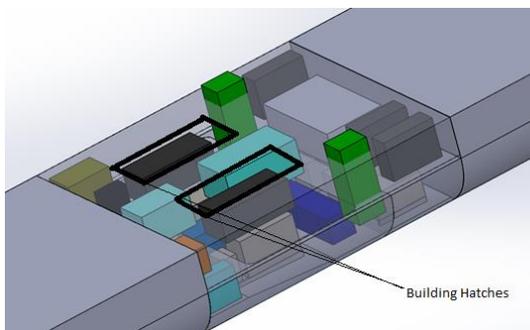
Modules in the engine room placed via a building hatch in the main deck.
